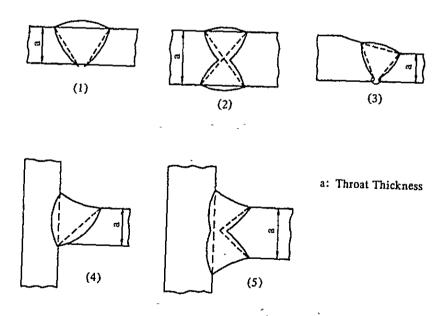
Throat Thickness of Groove Weld
